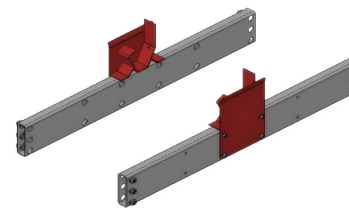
Pair of axle holders with retaining tubes excl. brake pads (3 pos.) for single drum allocation
